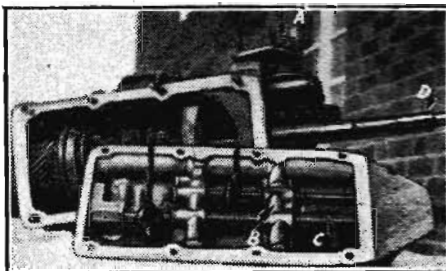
A further view of the gearbox-differential housing. (A) Differential drive flange. (B) Gear lock ball housing. (C) Gear locking spring and rod. (D) Main shaft.
